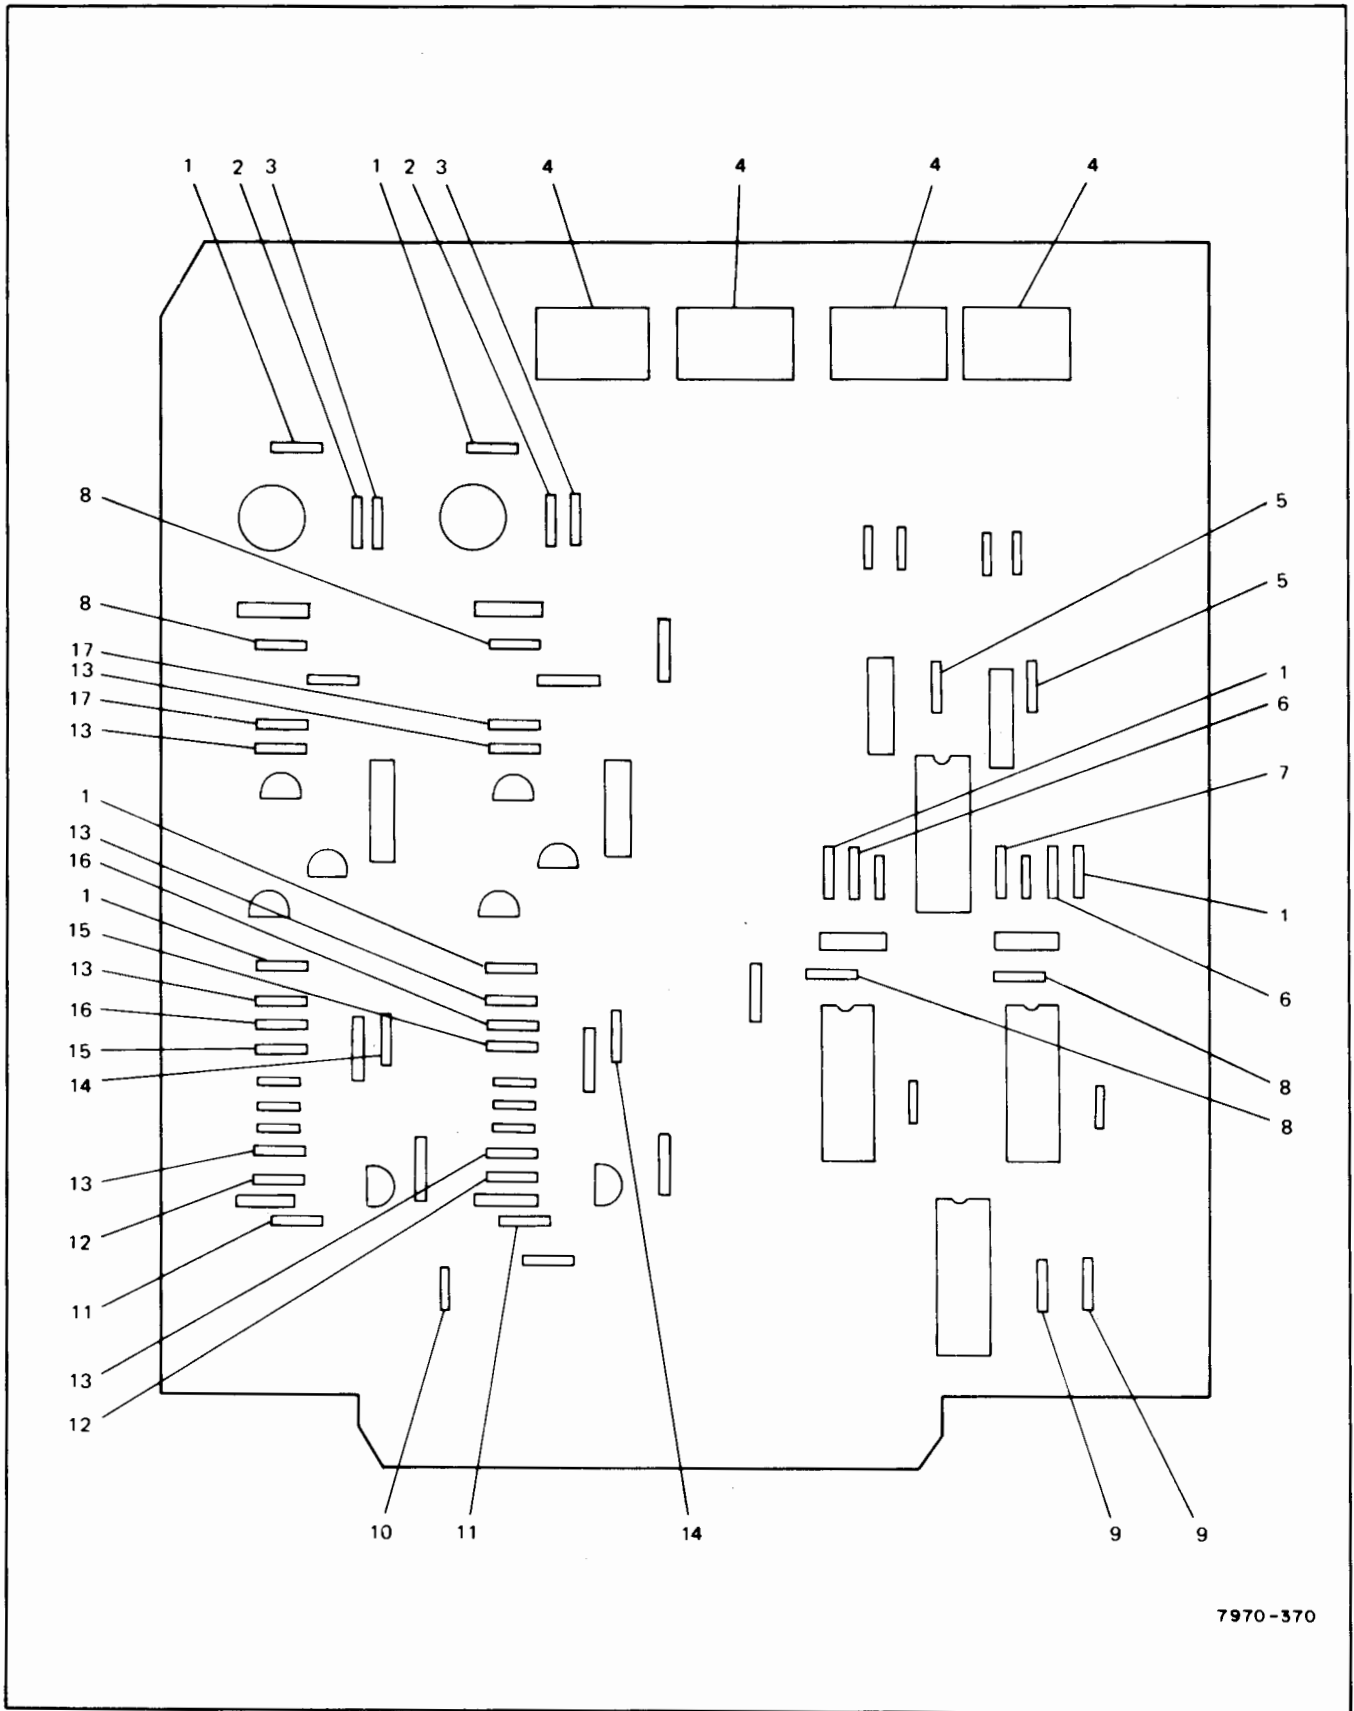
Single-Channel Read Data PC Assembly (21 - 45 IPS)
